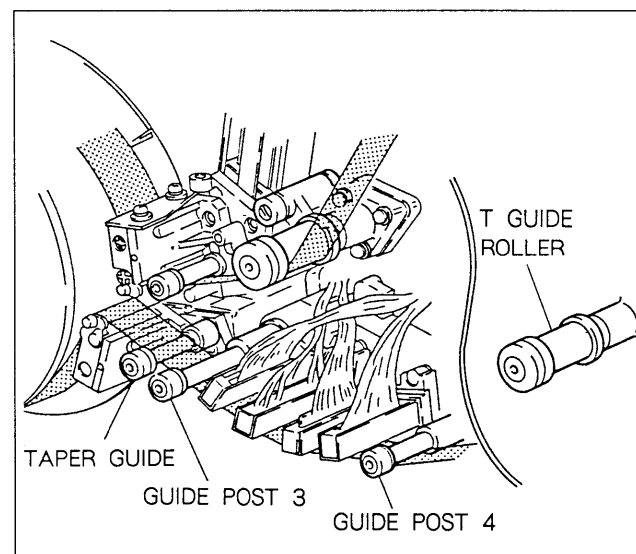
Taper Guide, Guide Post 3, Guide Post 4 and T Guide Roller
